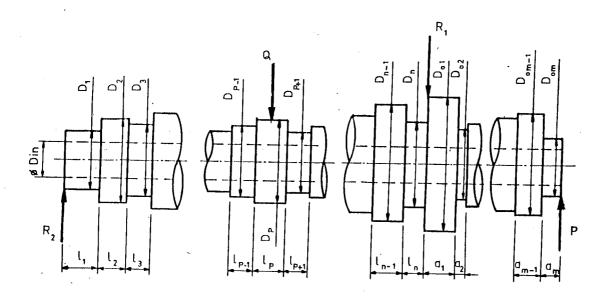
The Proposed Model for the Spindle of Lathes.
